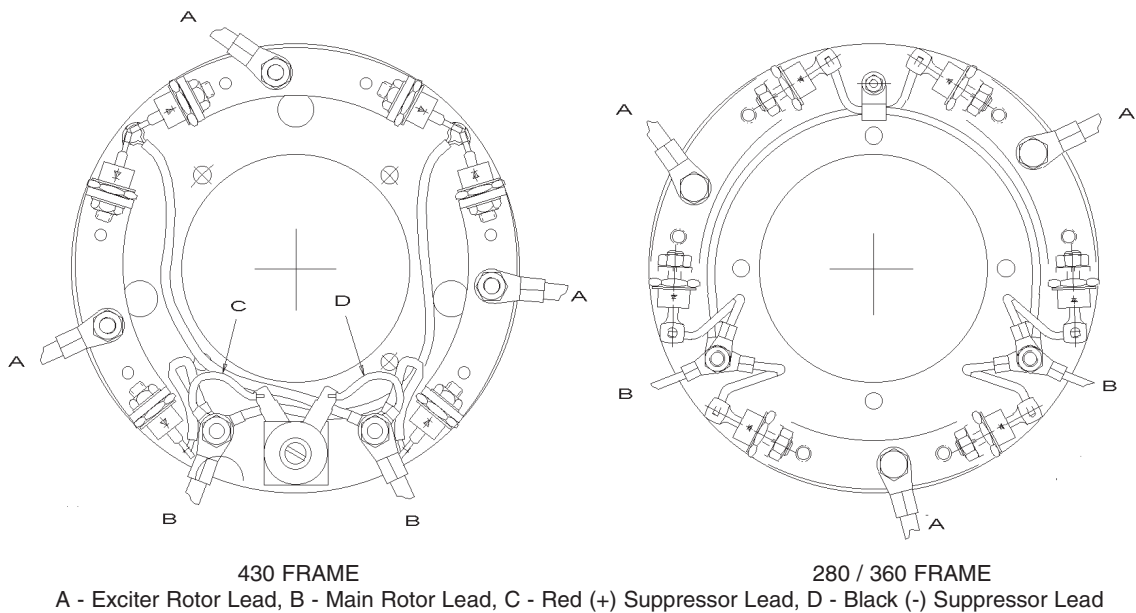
ROTATING RECTIFIER ASSEMBLY
